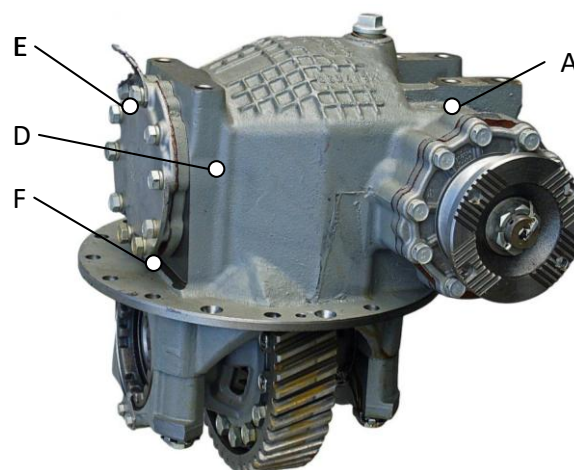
Rear axle gearbox with markers for bearings A, D, E and F
